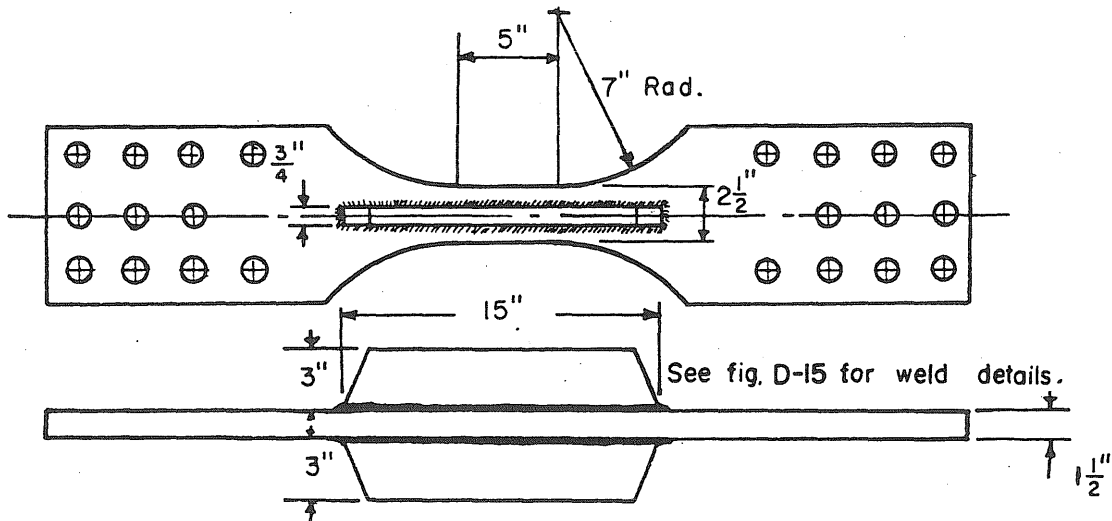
(Contd.) DETAILS OF TEST SPECIMENS.
